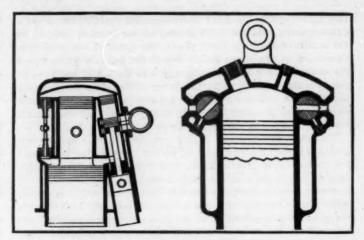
Construction of Hewitt piston-valve motor. Fig. 4—Cross section of the Mead rotary-cylinder engine
